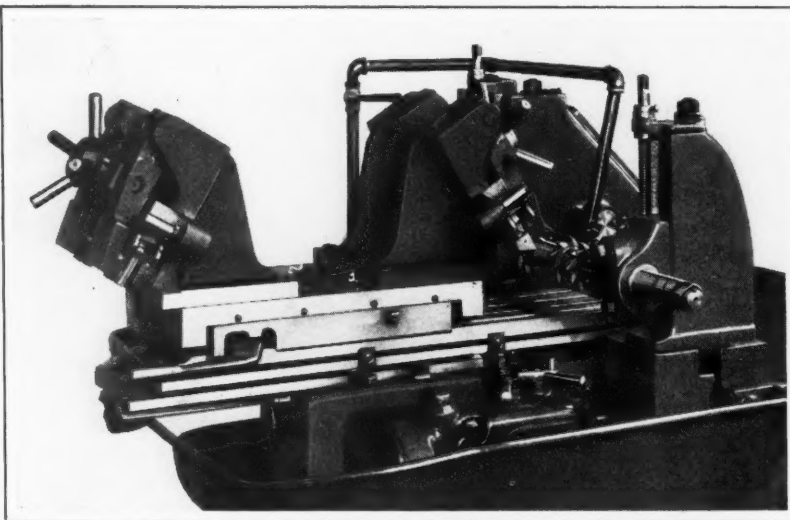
Automatic Milling Machine Equipped for Producing a V-shaped Surface at One End of Brake-shoe Adjusters
